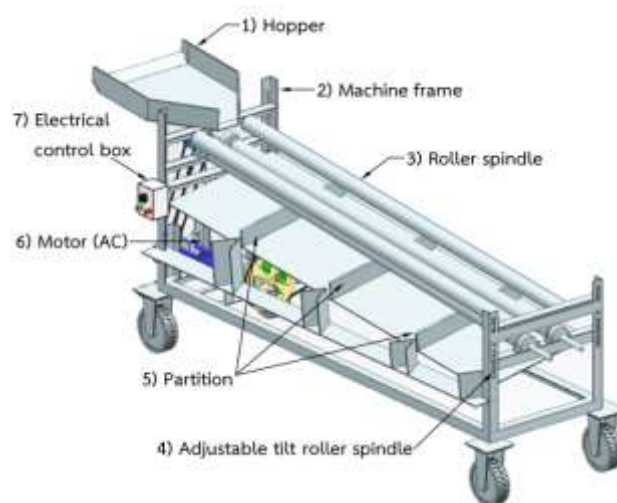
Assembly drawing and details of a sapodilla sizing machine using expanding rollers, Model 2.
